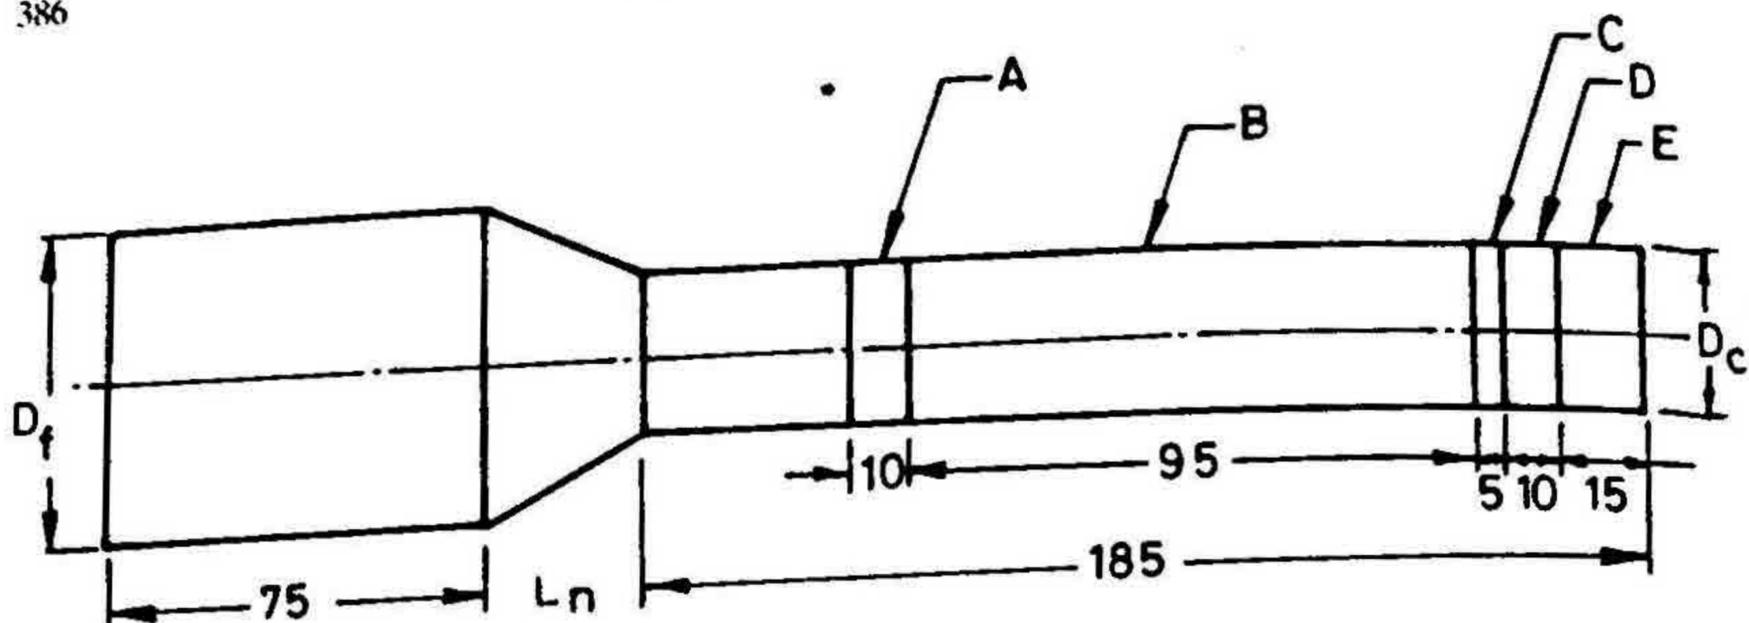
Details showing location of test specimens in the test casting taken for various tests.
